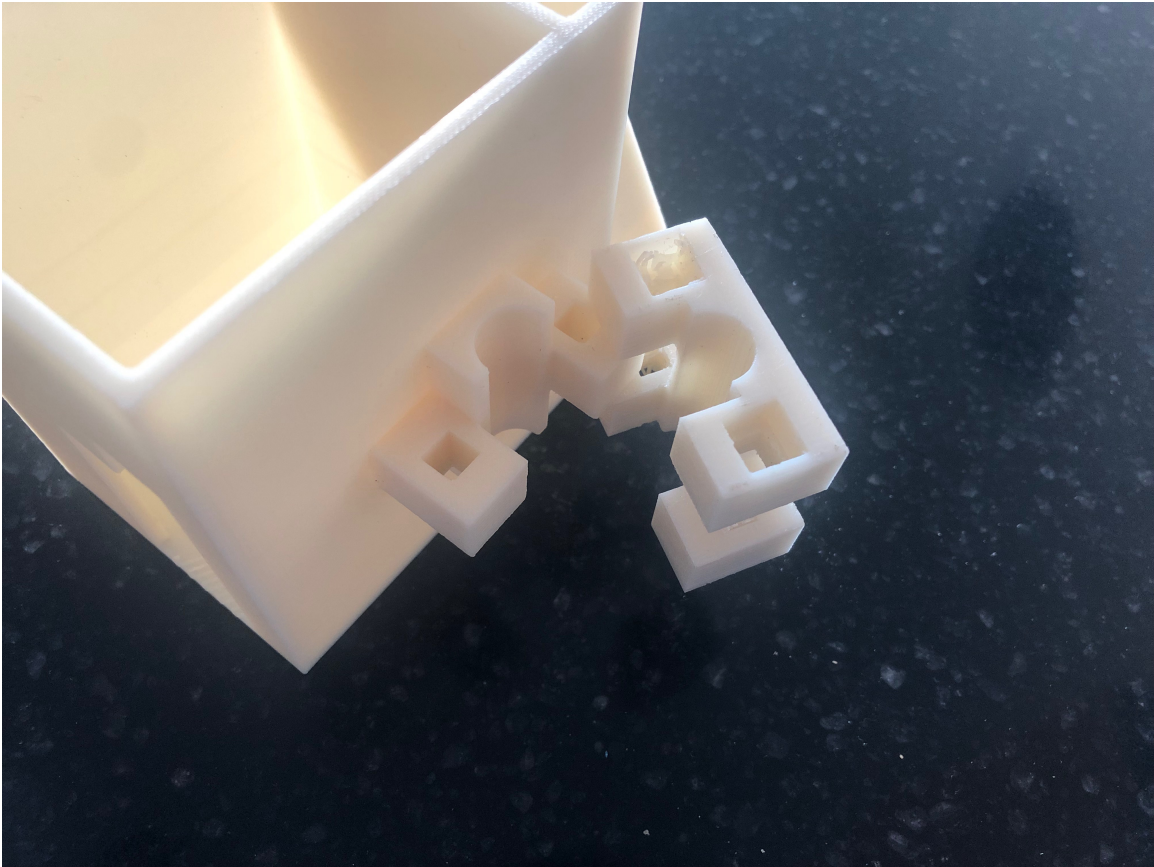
Two part plastic shaft collar printed and used as mount for the device
